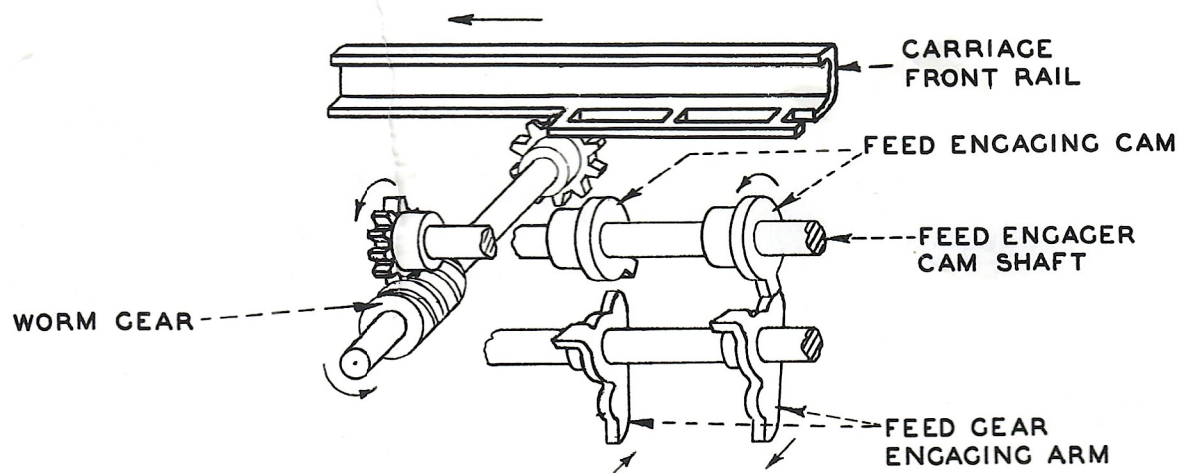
FEED ENGAGER SHAFT AND CAMS: As the shift cycle of the division operation occurs, the carriage front rail causes the rotation of the worm gear of the gear box. The rotation of this gear rotates the feed engager cam shaft and causes the left feed engaging cam to disengage the feed gear engaging arm. This action allows the restoration of the 1 to 5 selecting arm positioned in FIG. 8. and the restoration of the feed gear positioned in FIG. 9.
